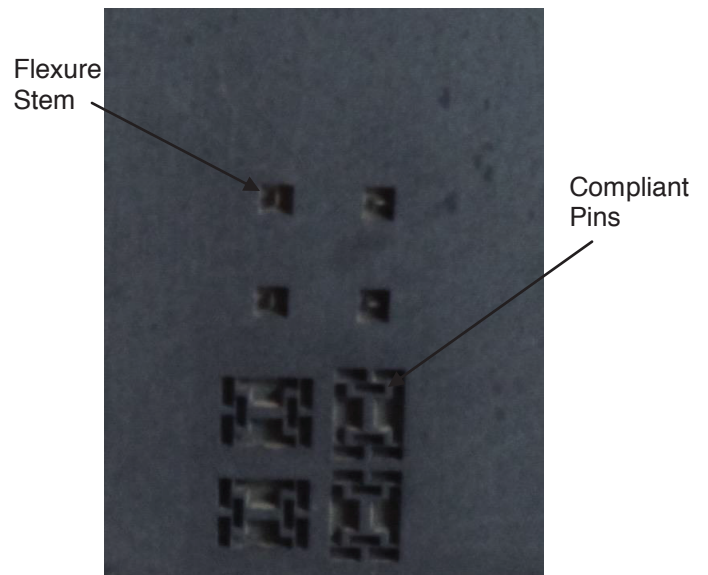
Compliant pins and flexure stems laser machined on a piece of SiC.
